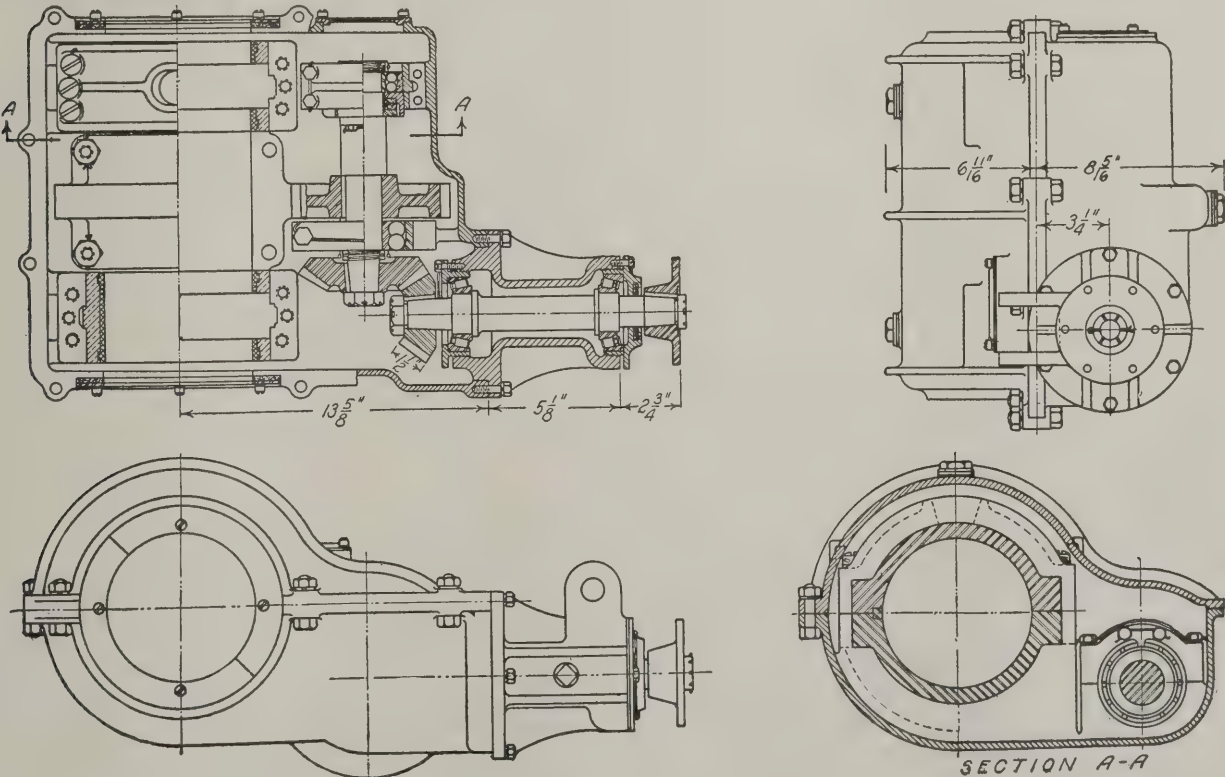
Assembly Drawing of Main Part of Gould Drive
